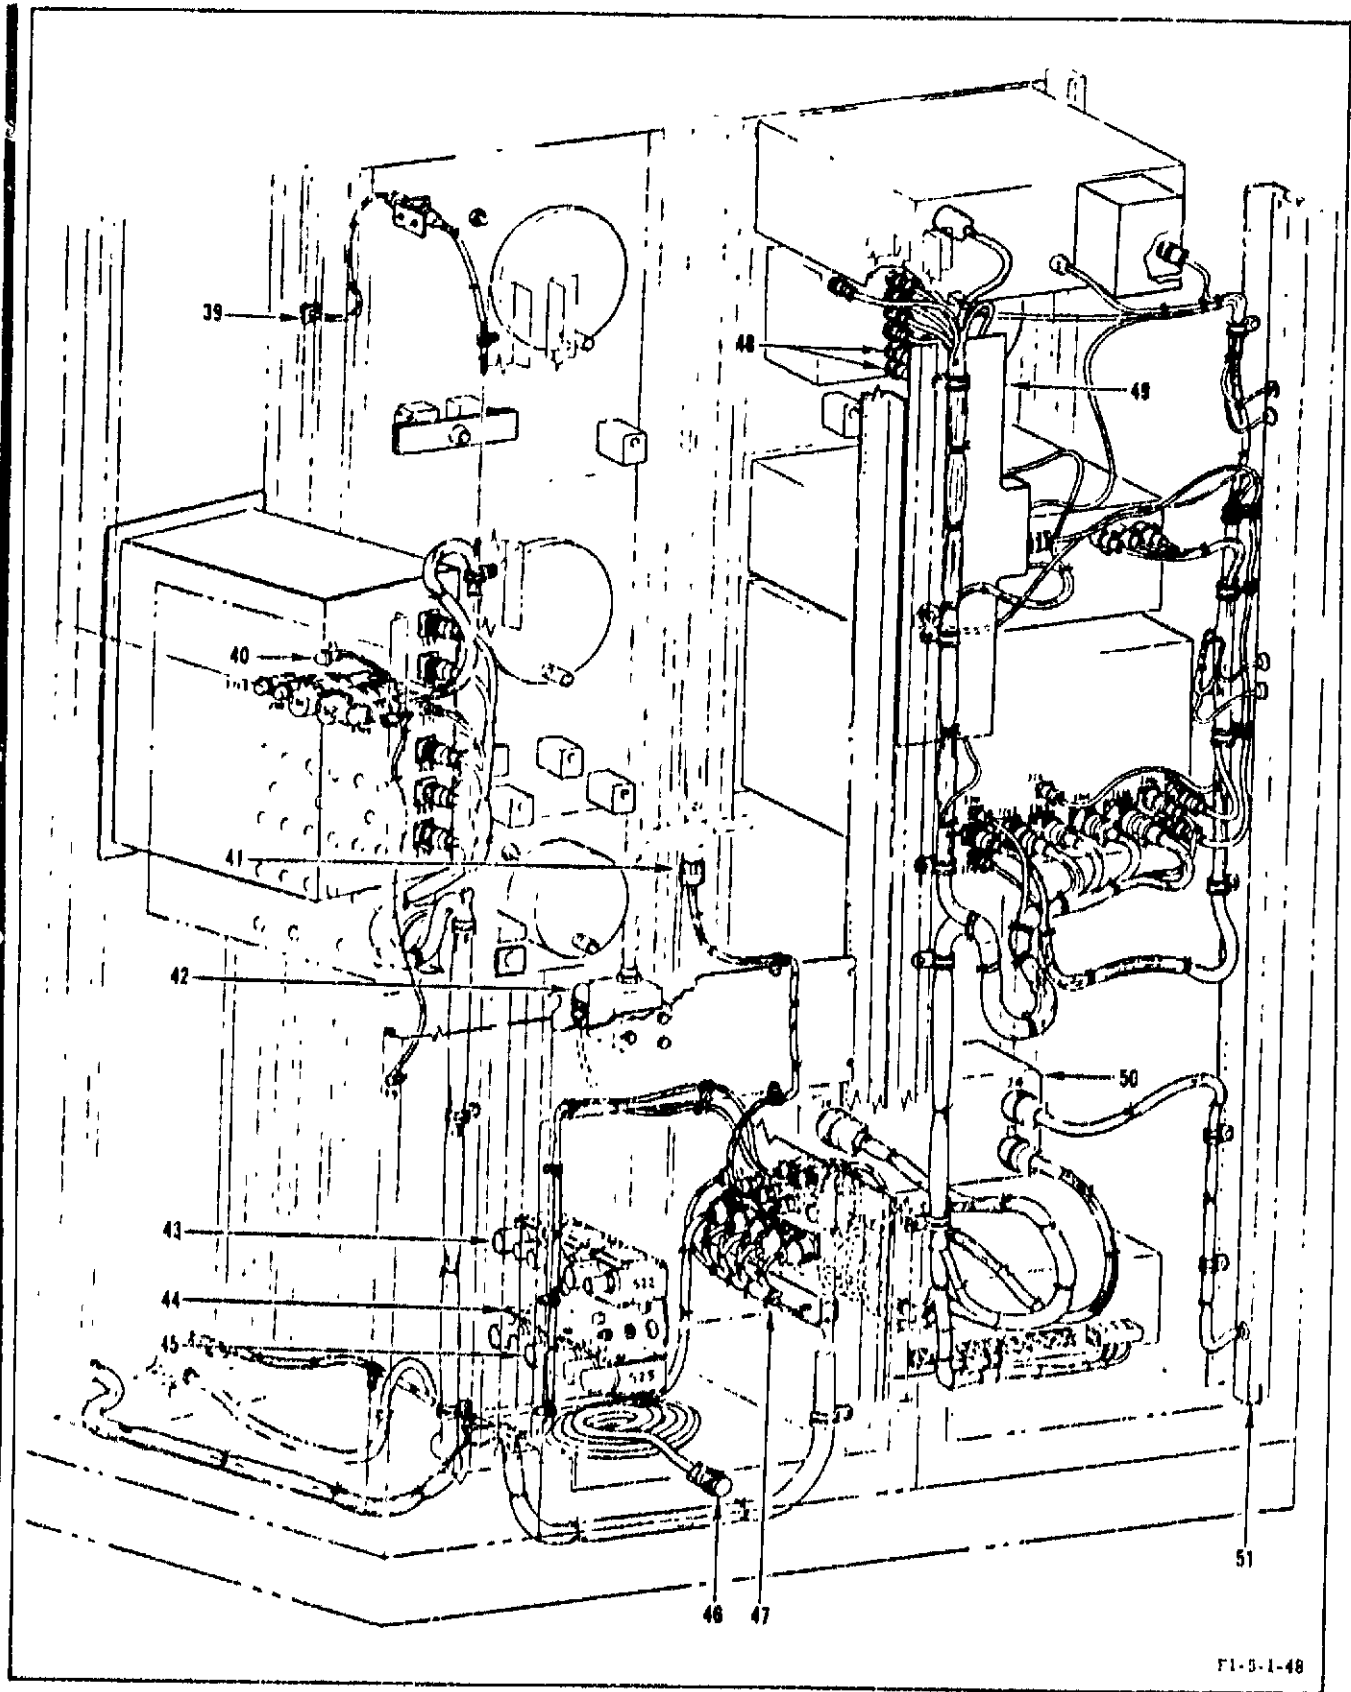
Disassembly of Components Test Console (Sheet 1 of 25)
